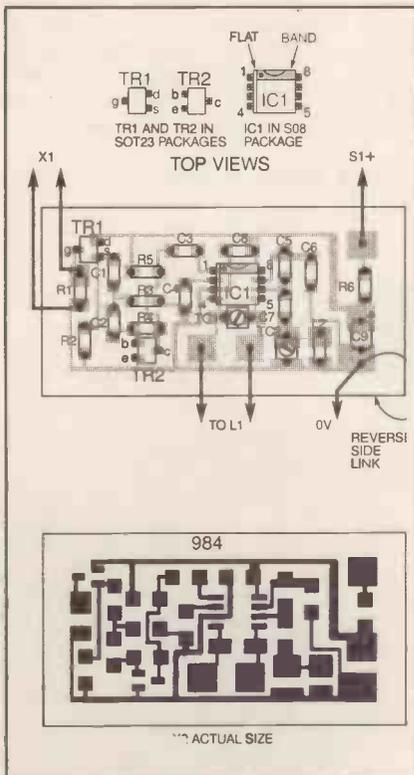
Printed circuit board component layout and copper foil master pattern.
